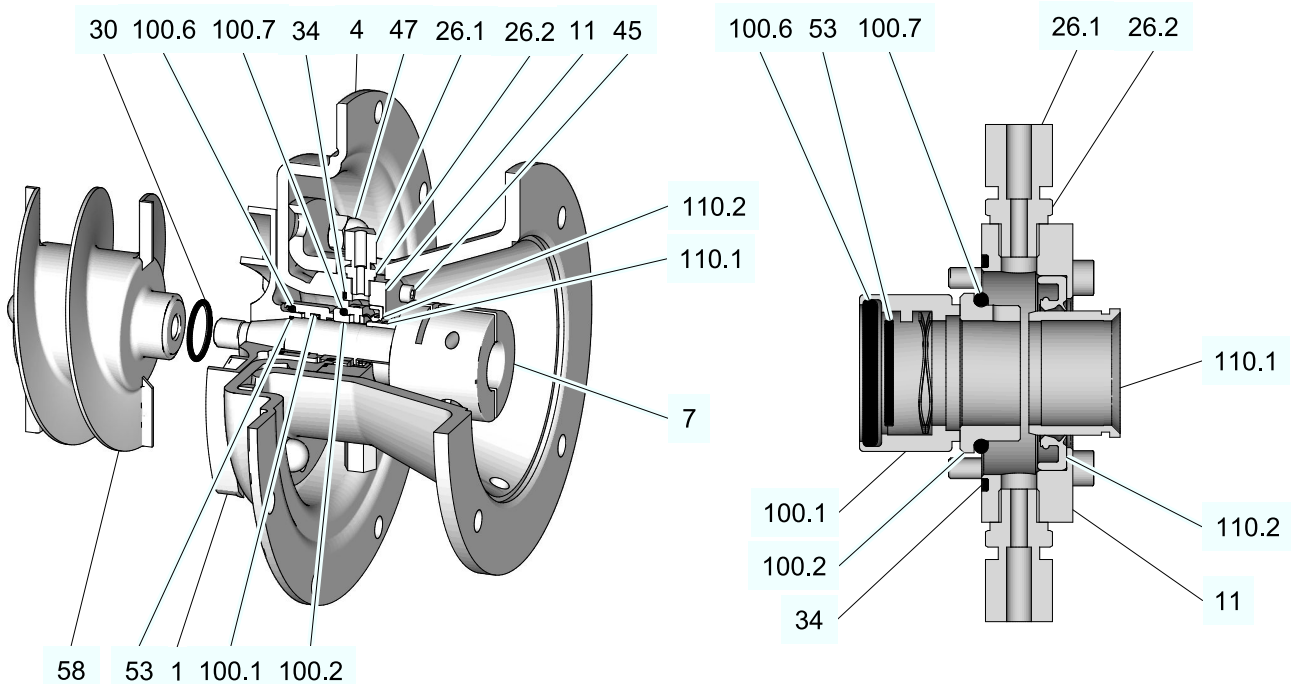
Single-acting flushed mechanical seal QU (A) with detail
